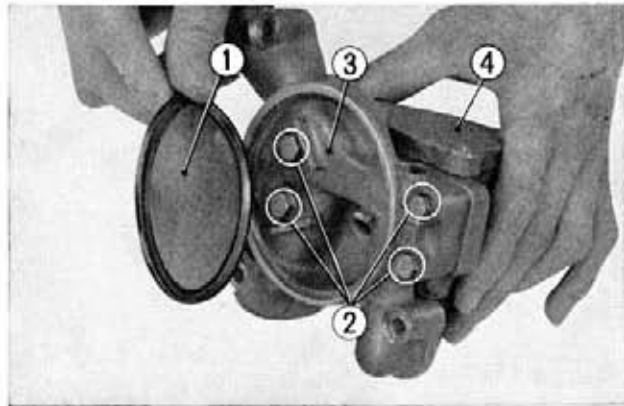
① Metal oil screen ③ Oil pump base
